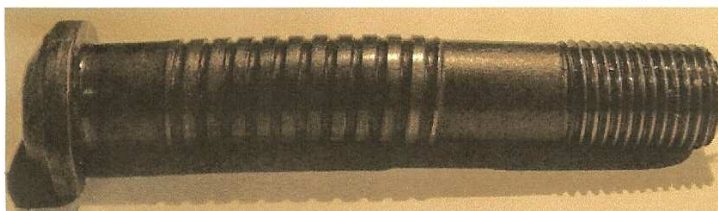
Big-end cap fastener bolt showing some bending damages (digital)
